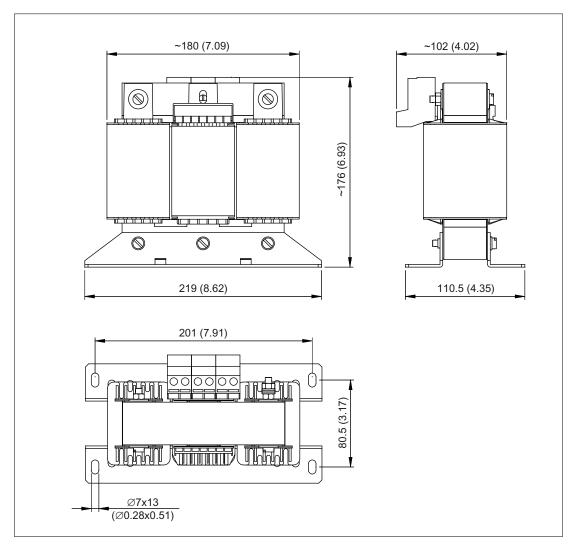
Dimension drawing of line reactor for S120 Combi (16 kW infeed), all dimensions in mm and (inches)
